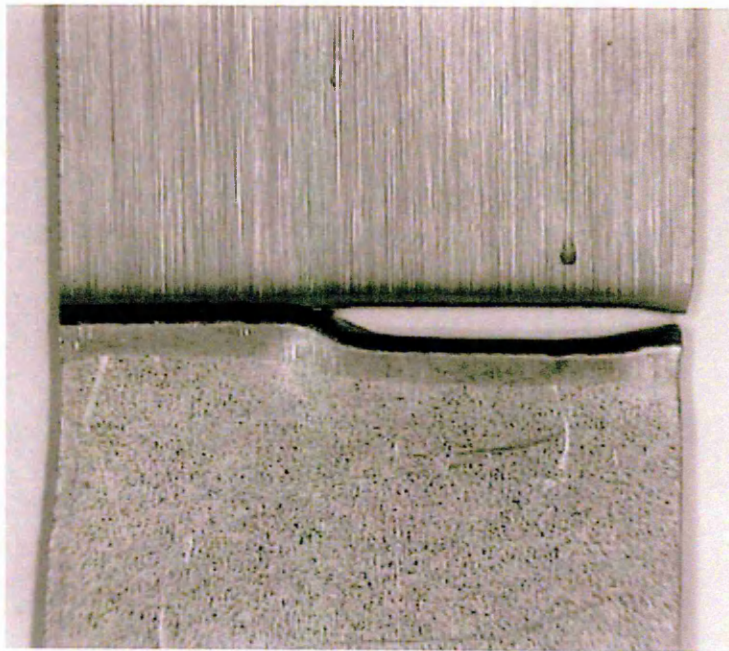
1.2mm V1437 – 1mm 2101 dissimilar metal butt joint fatigue failure – 2101 HAZ failure
